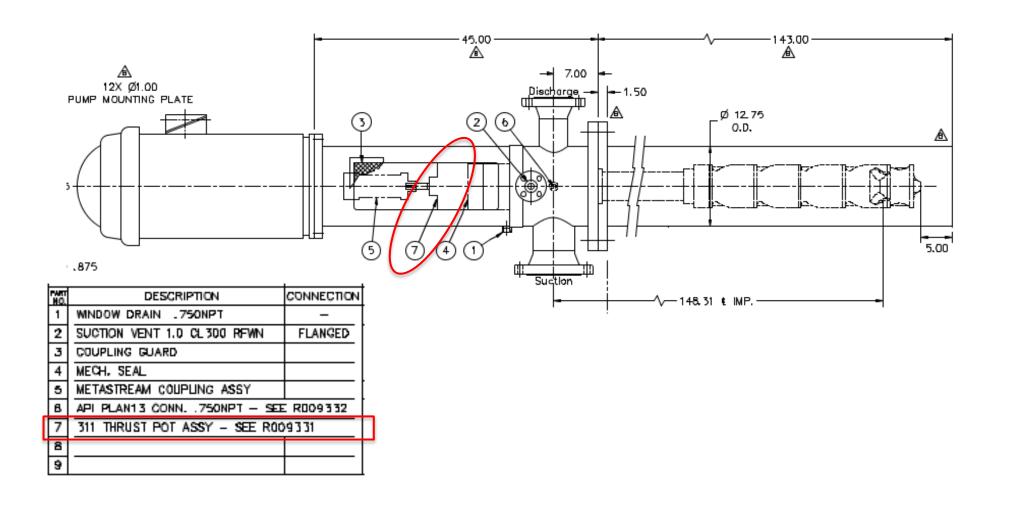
Thrust Pot Model 311 / 311 QJ Sectional Drawing
